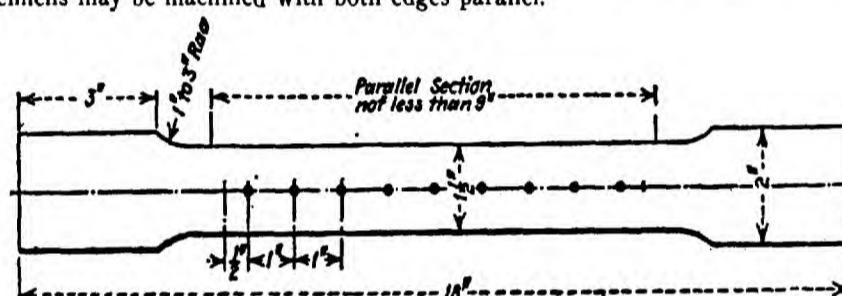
Standard Form of Test Specimen Required for All Tension Tests of Plate Material.
